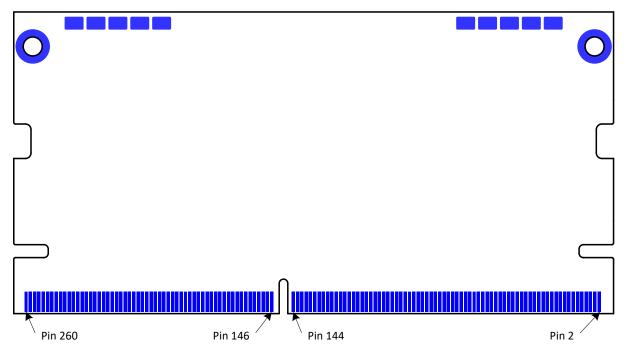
Pin numbering schema on the bottom side of the module (bottom view)
